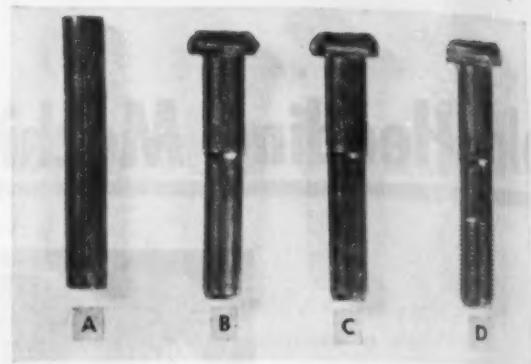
Successive stages in the production of Ford connecting rod bolts: (A) blank cut from steel wire, (B) after extrusion, chamfering and heading, (C) after head trimming and (D) after thread rolling.
